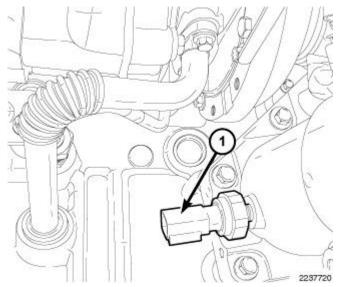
Oil Pressure Switch Courtesy of CHRYSLER LLC
